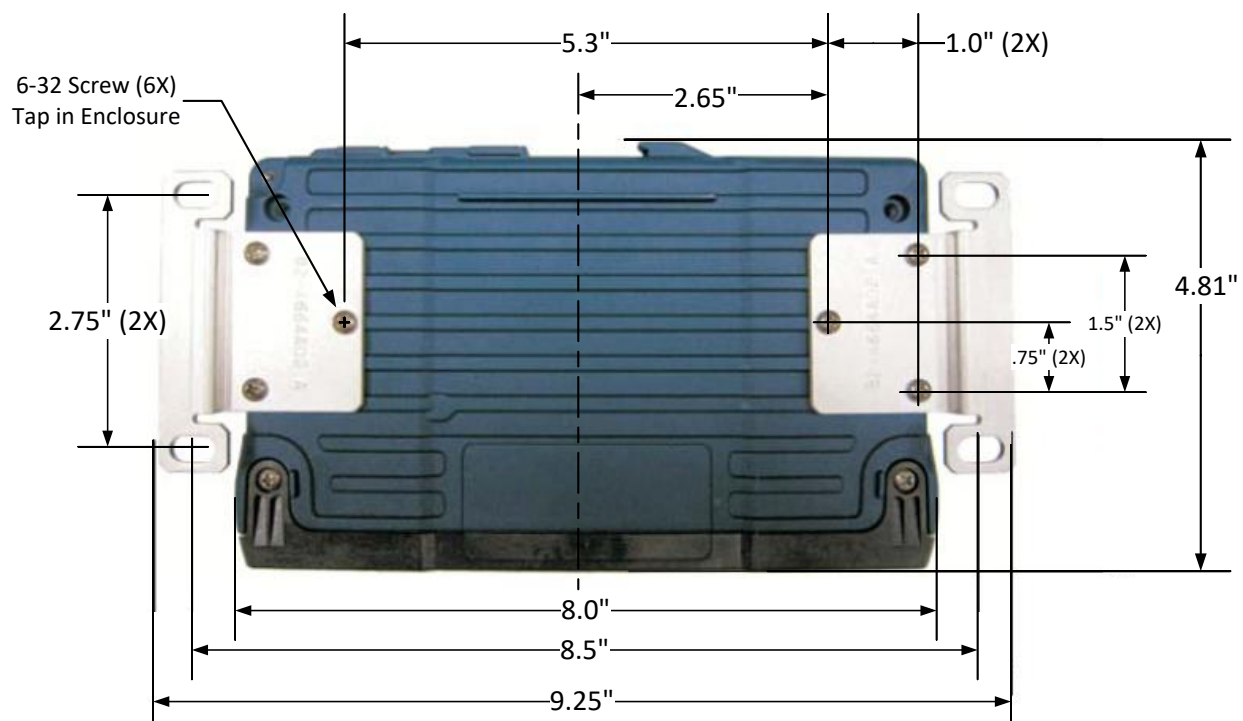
MCR Flat Mounting Bracket Dimensions
